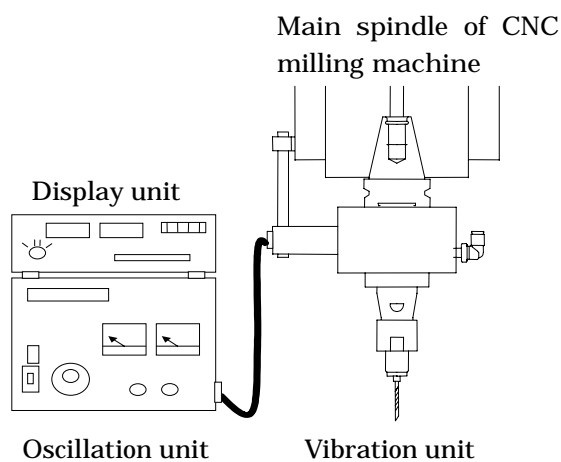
Schematic drilling experimental setup assisted by ultrasonic torsional mode vibration.
